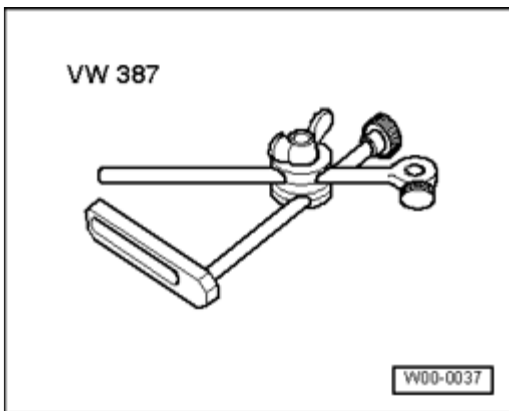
Identifying VW 387 Universal Dial Gauge Bracket
